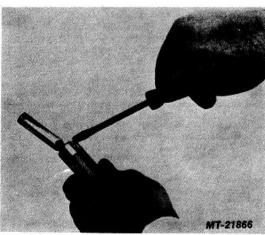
Removing Piston Retaining Ring on Original Design Slack Adjuster
